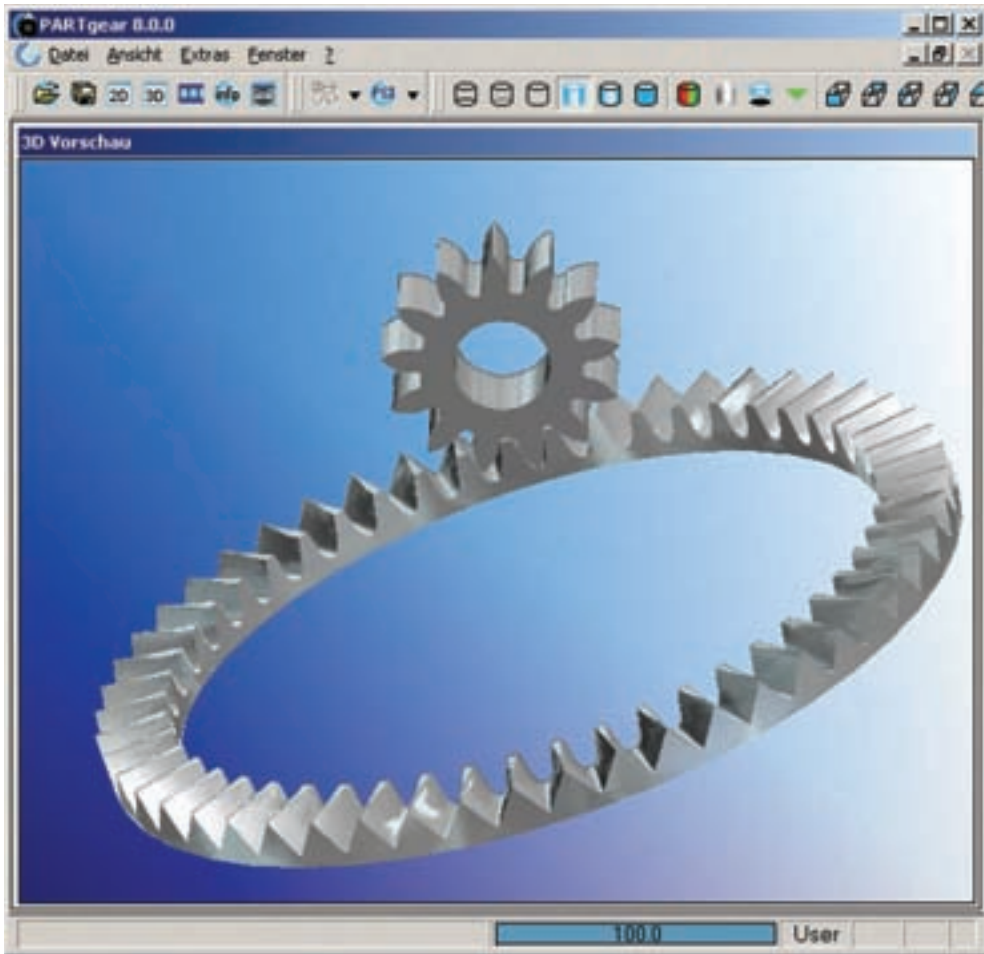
3-D view of a face gear in KISSsoft, produced by the calculation of the mesh process of a face gear with a shaping cutter.
